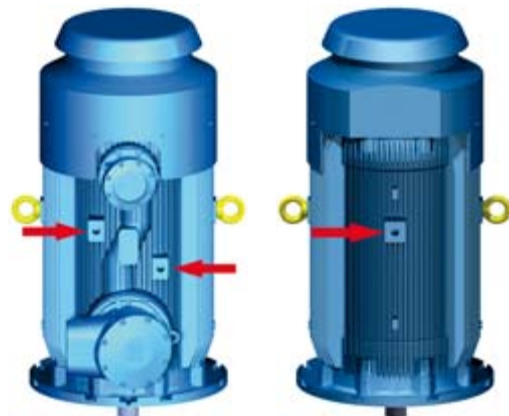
Threaded holes for fastening the eyebolts in motors without feet
